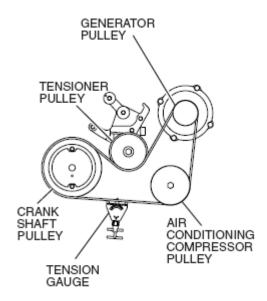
Holding Special Tool MB992080 To Middle Of Drive Belt Between Pulleys Courtesy of MITSUBISHI MOTOR SALES OF AMERICA.
